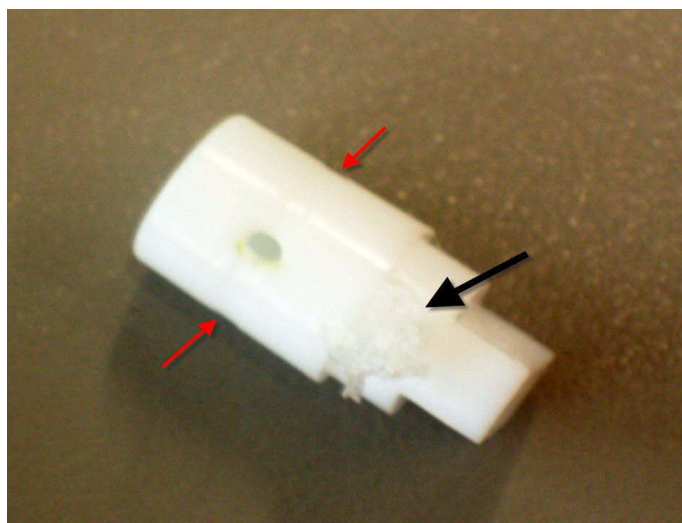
7 Strong leakage of the Hamilton 8-port valve drive
